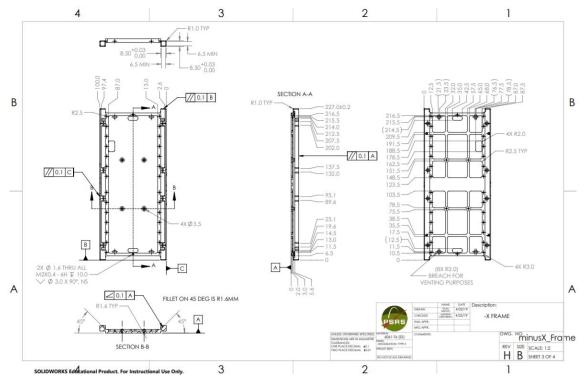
1 of 3 Dimensioned Drawing of the minus X OreSat Frame
